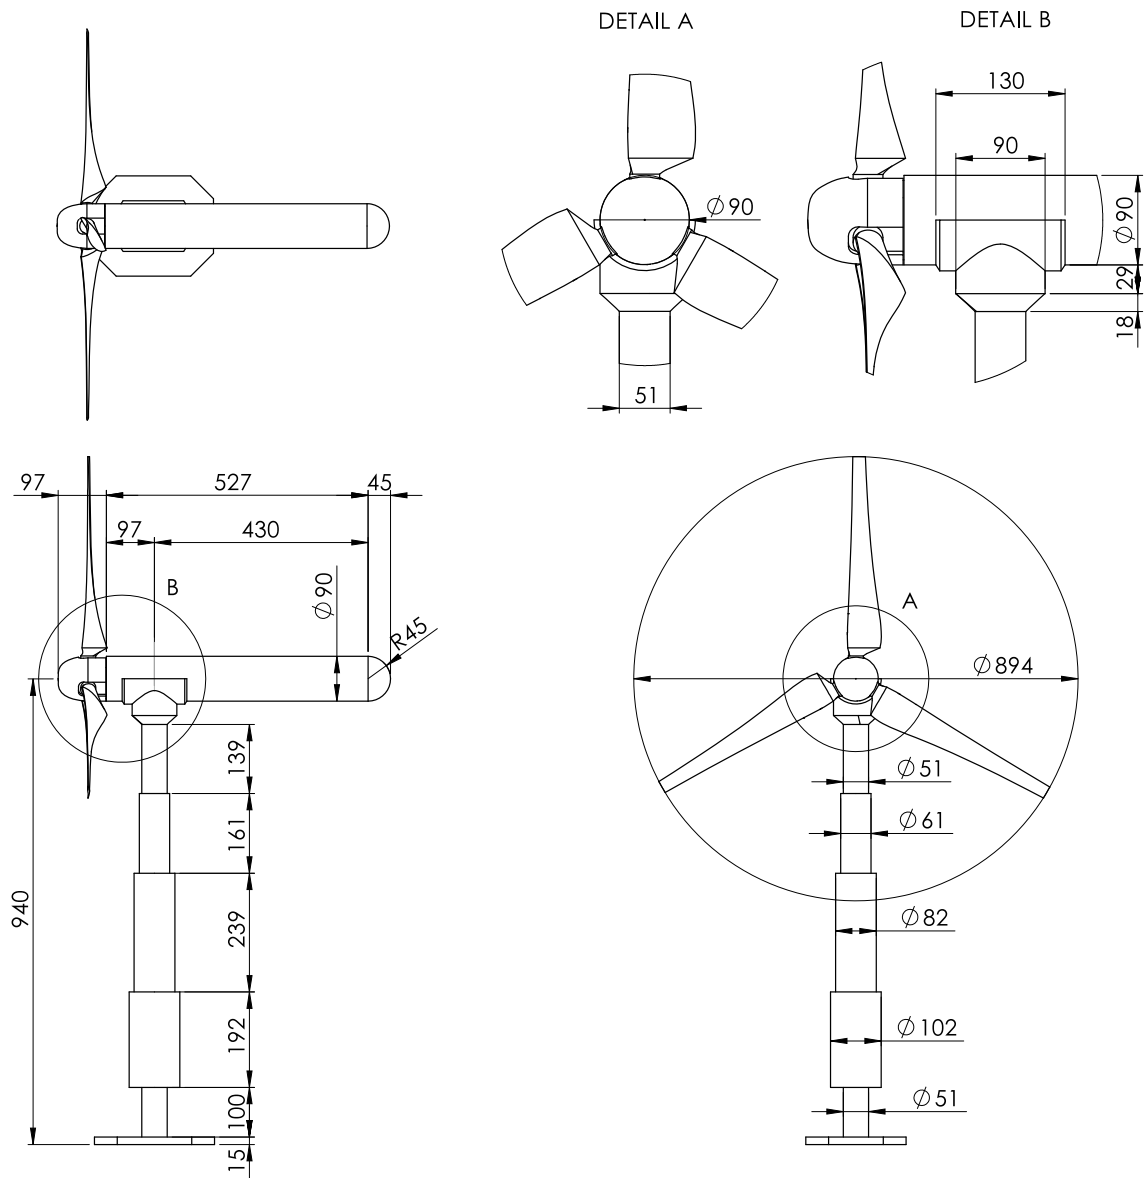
Technical drawing of NTNU model wind turbine T2.
